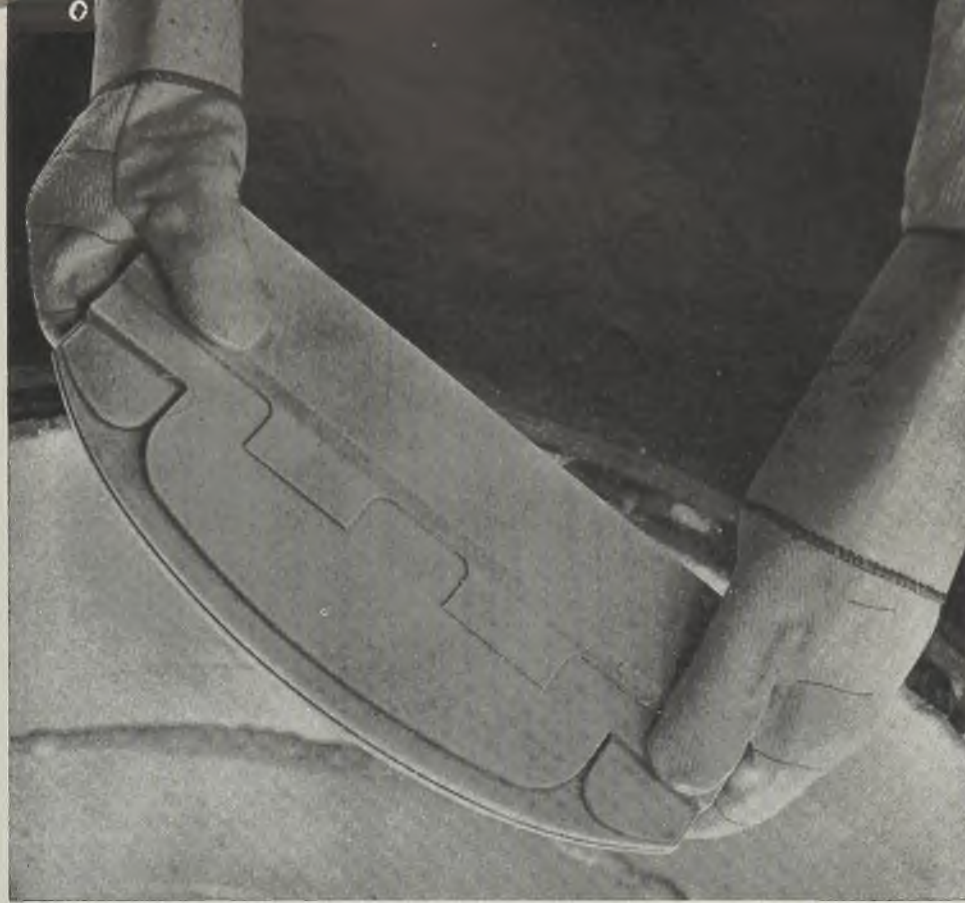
(Above)—Hubbing master of high-carbon high-chromium tool steel for sinking plastic mold die cavities. It is hardened in conventional manner to 65 rockwell C; tempered in boiling water for one hour; cooled to minus 100 degrees Fahr. in sub-zero chamber; warmed to room temperature; and tempered at approximately 900 degrees Fahr. to a hardness of 60/62 rockwell C. This results in a combination of strength and toughness that is much better than by conventional quench and temper treatment.
